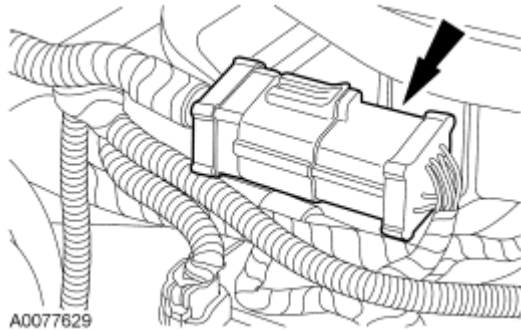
Locating Engine Harness-To-Fuel Charging Harness Electrical Connector
